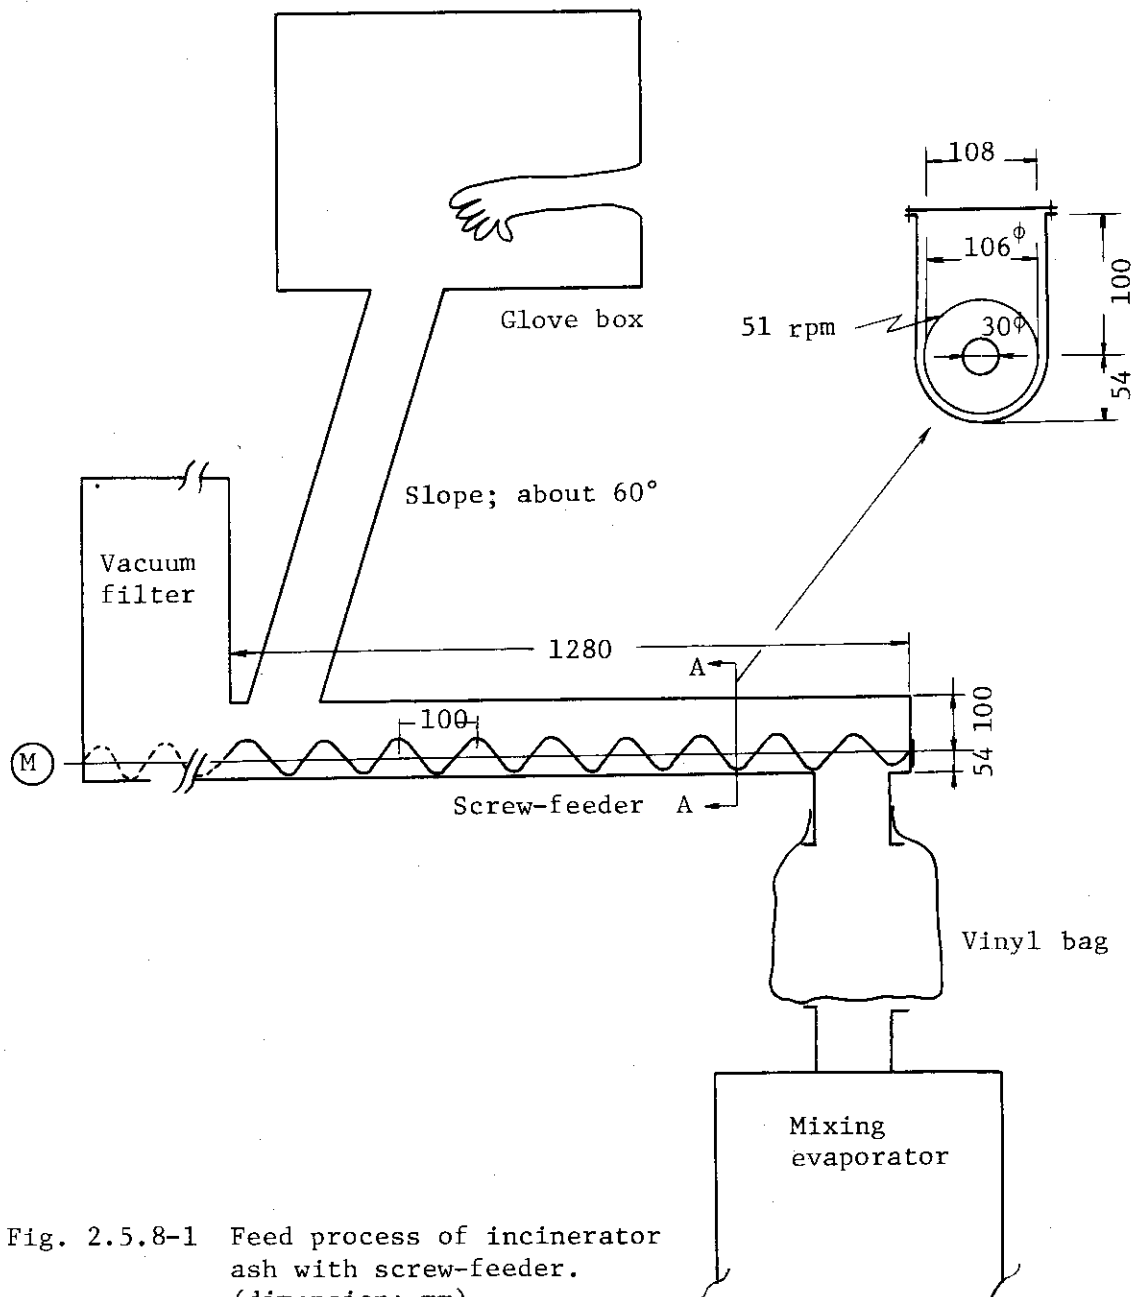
Feed process of incinerator ash with screw-feeder. (dimension; mm)
